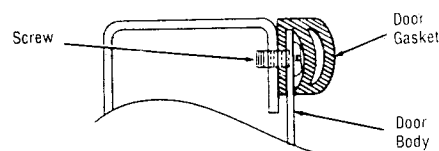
CROSS SECTION OF DOOR GASKET (HINGED DOOR ONLY).
